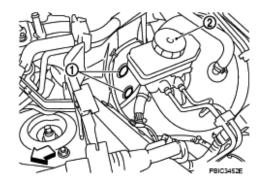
Identifying Brake Master Cylinder Cover And Grommets
